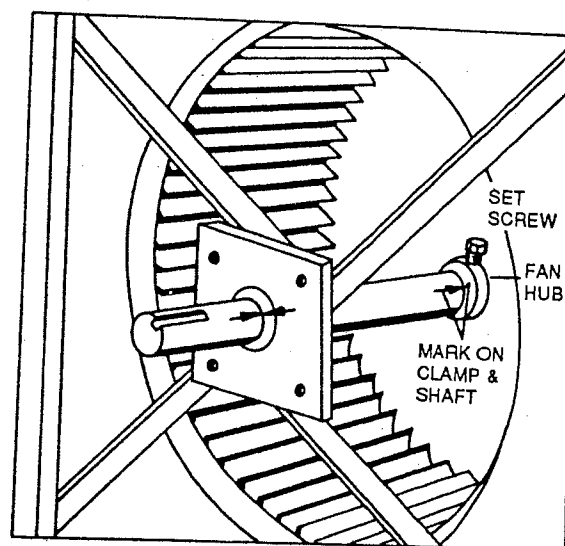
FC FAN SHAFT AND WHEEL MARKING
